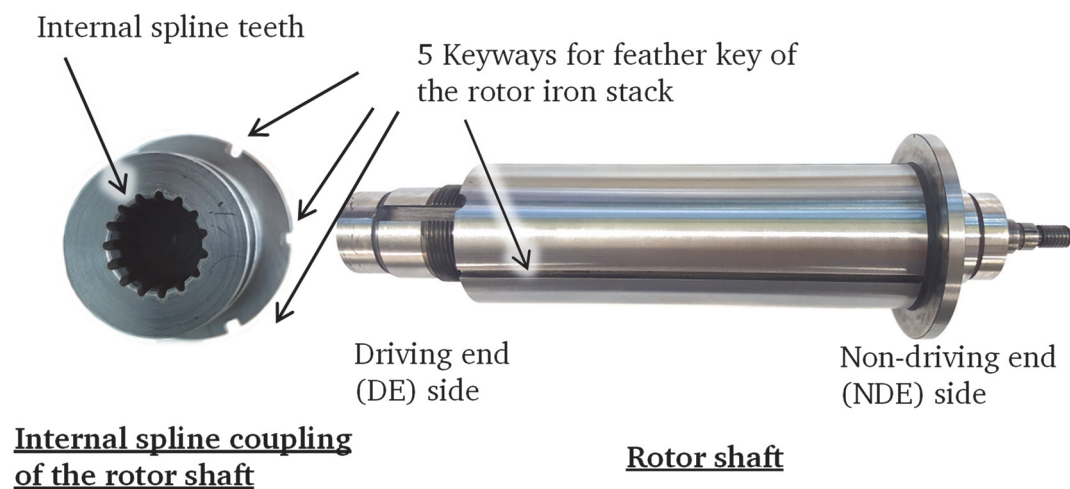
Left: Internal spline coupling of the rotor shaft to the transmission of the DE-REX powertrain, Right: Rotor shaft of the electric machine
